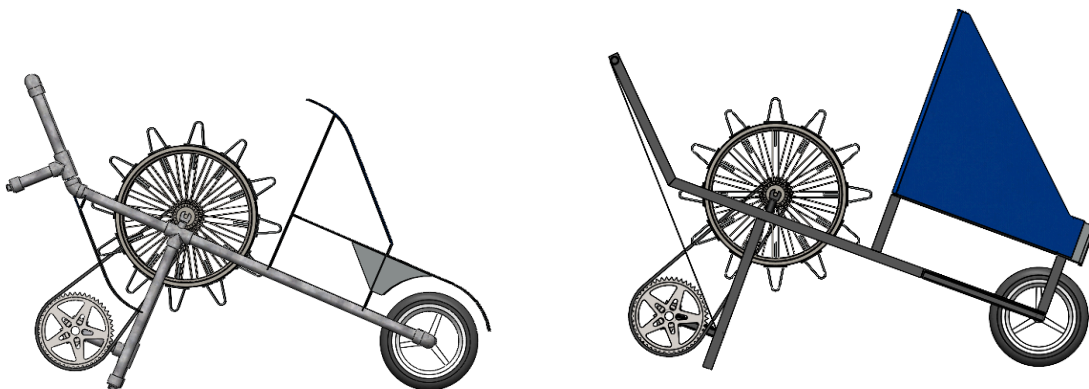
Two frame options of threaded GI pipe with connectors and MS L-angle weldment
